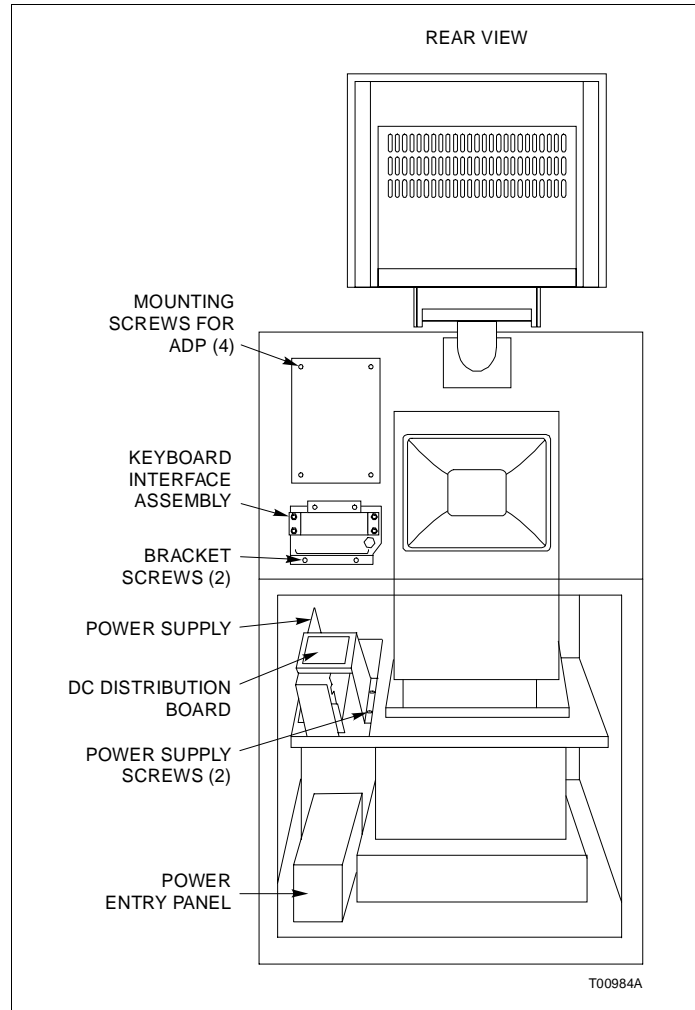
ADP02 and Keyboard Interface Assembly Removal from Console
